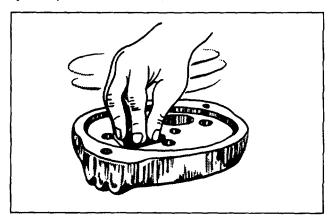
Use of Small File Piece to Remove Burrs and Nicks
